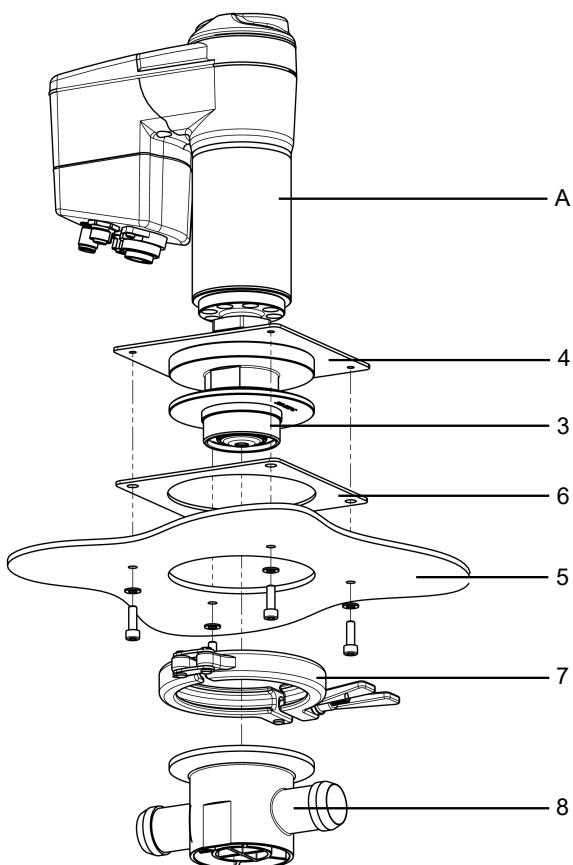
Disassembling the pneumatic stainless steel actuator – housing
